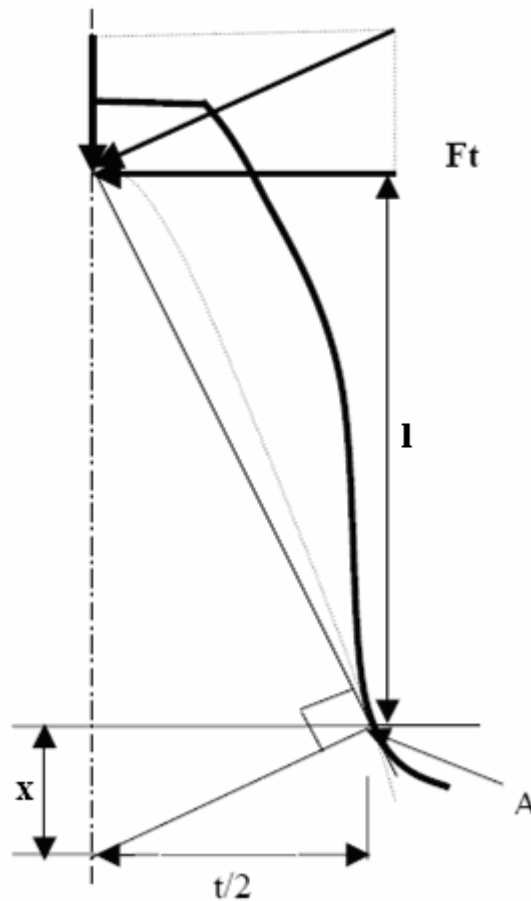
the cross section and the dimensions of gear tooth profile to determine the Lewis formula
